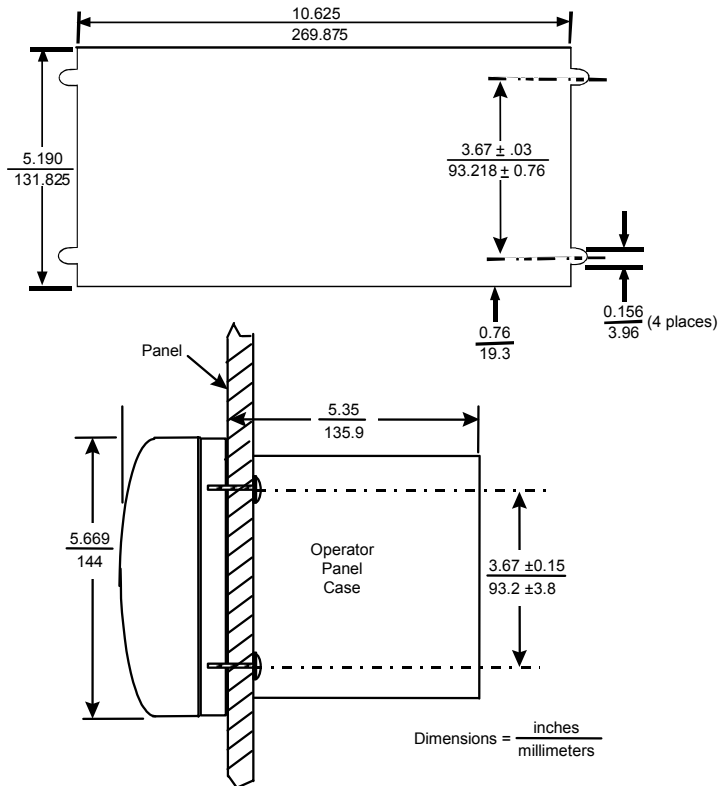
Cutout Dimensions for Operator Interface DIN Panel Mounting, Model 559-Type 4X
